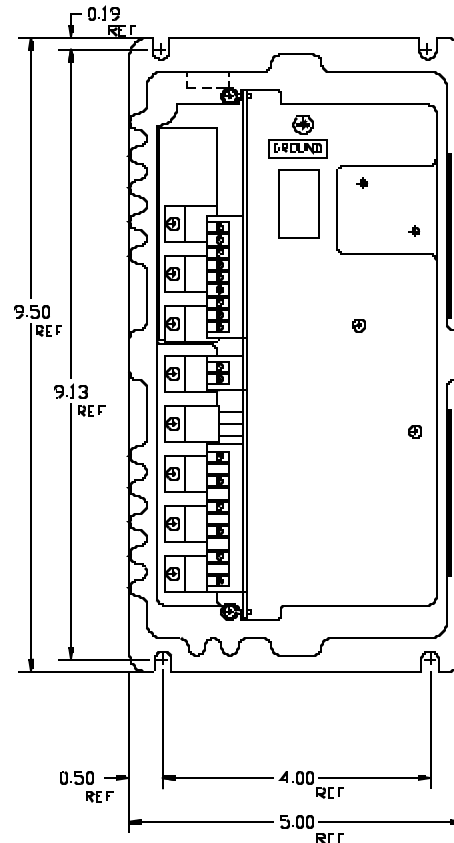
CONTROLLER MOUNTING DIMENSIONS, MODELS 2231 AND 2232
